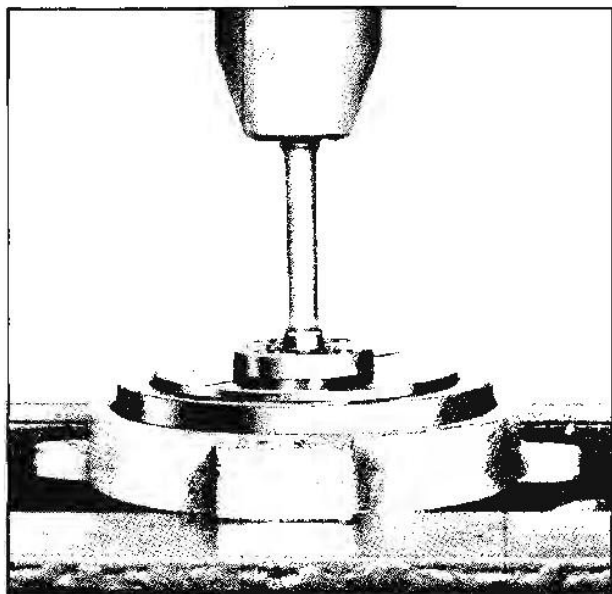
A-19 Pressing Pump Shaft From Hub (6 Cyl.)
